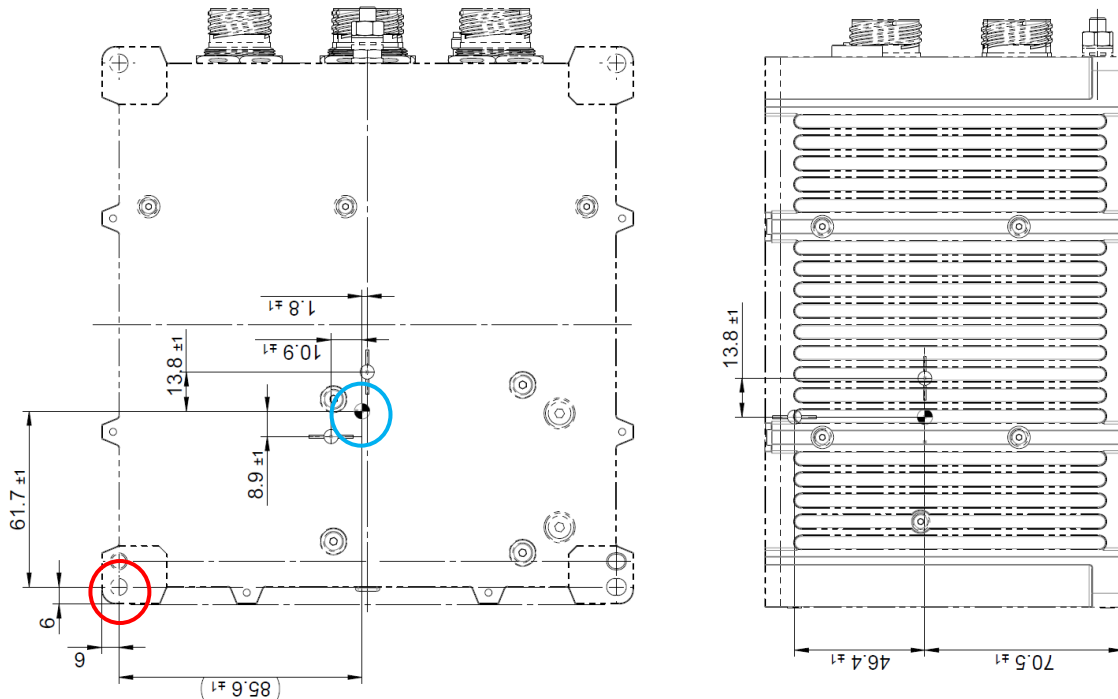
Sensor Intersection Point (Accelerometers) inside the Drawing
